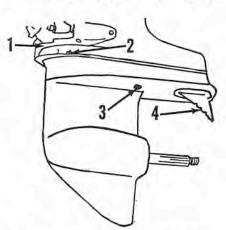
View of typical lower unit showing location of attaching screws securing gearcase housing. Refer to text for details.
